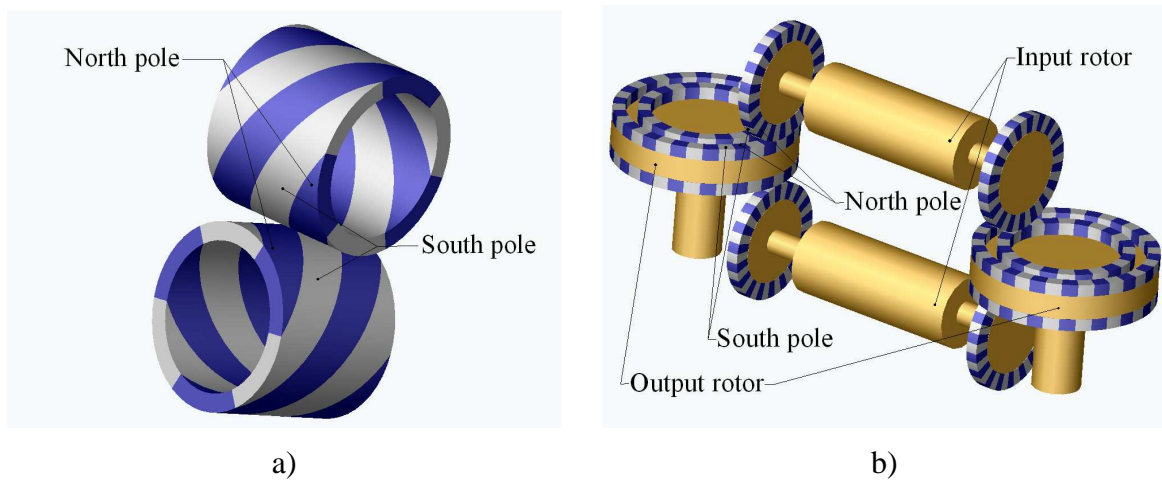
a) Perpendicular axis gear [33]. b) Variable magnetic gear with two output shafts [34].
